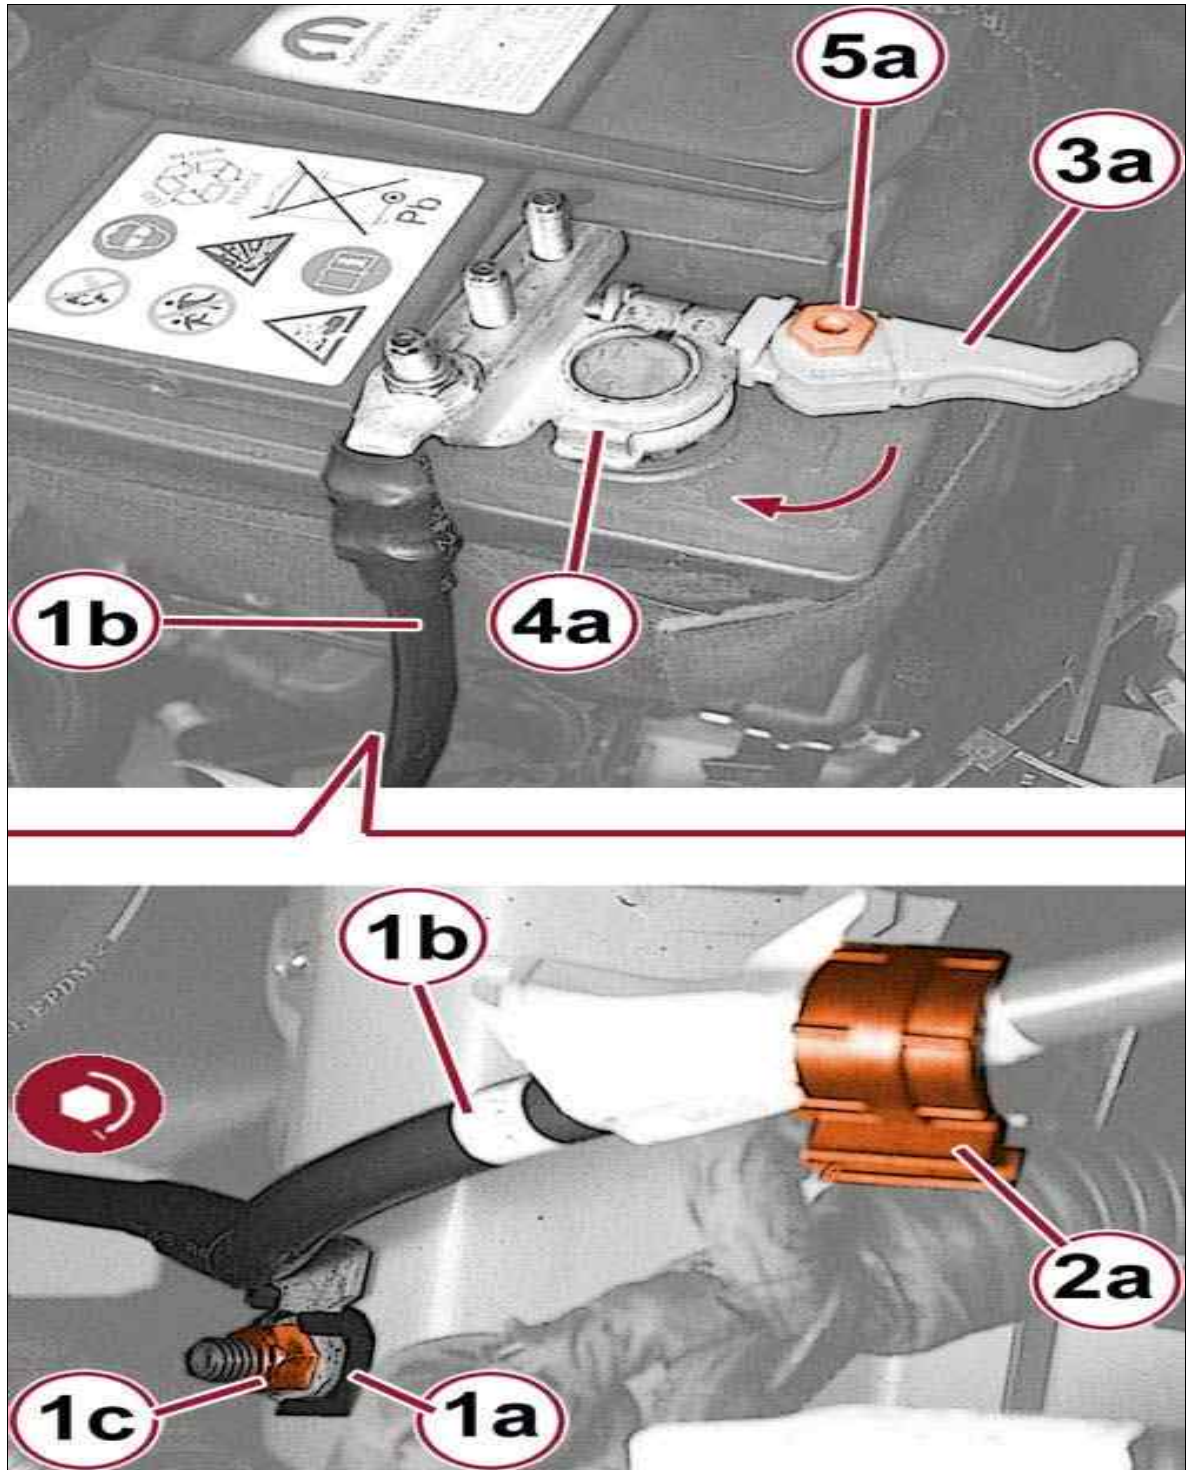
Battery Negative Cable, Gearbox Terminal & Screw
